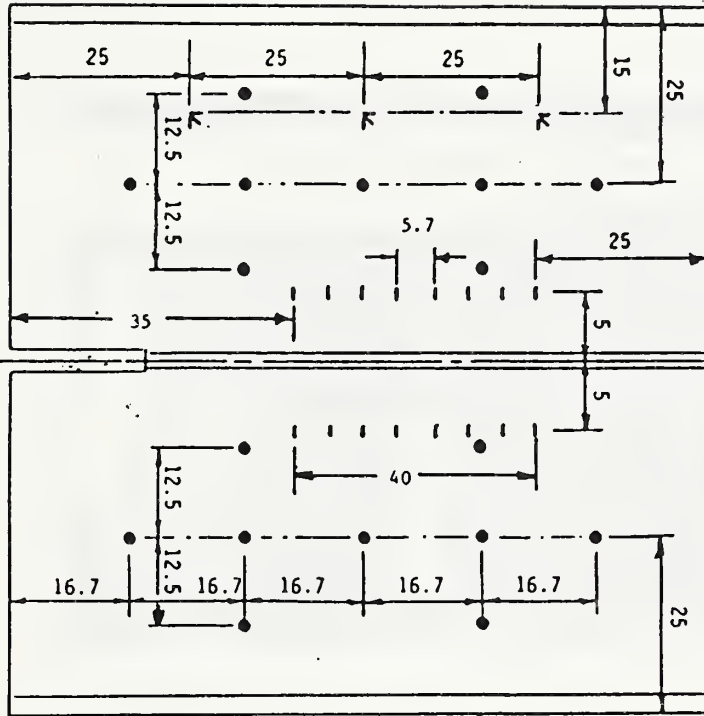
Suggested locations of thermocouples and strain gages on ORNL specimen. Dimensions in centimeters.
